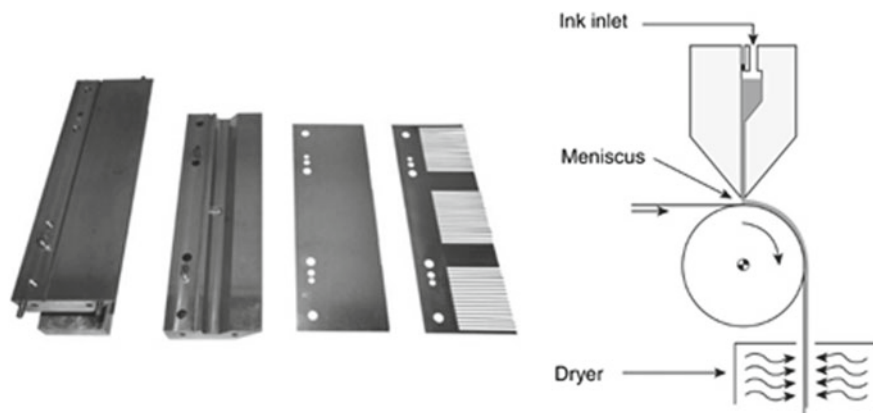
Slot-die coating process (right) and the disassembled head including the stripe mask (left)
